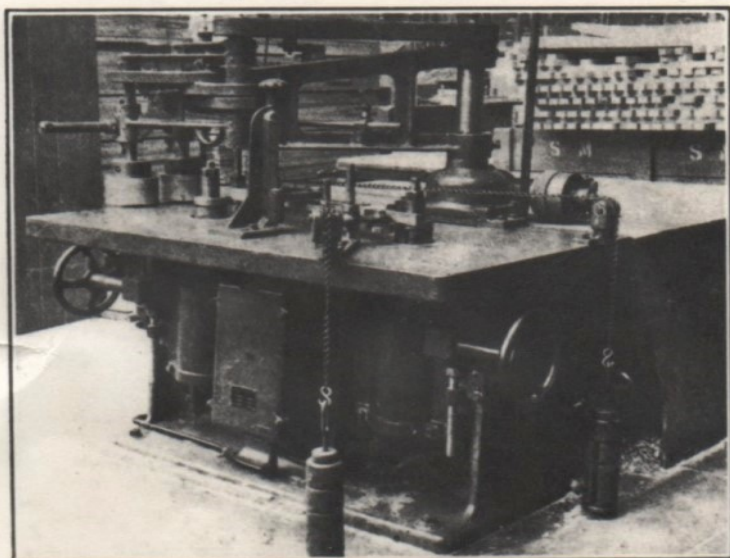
A double-spindle vertical moulder for pillar shaping.
